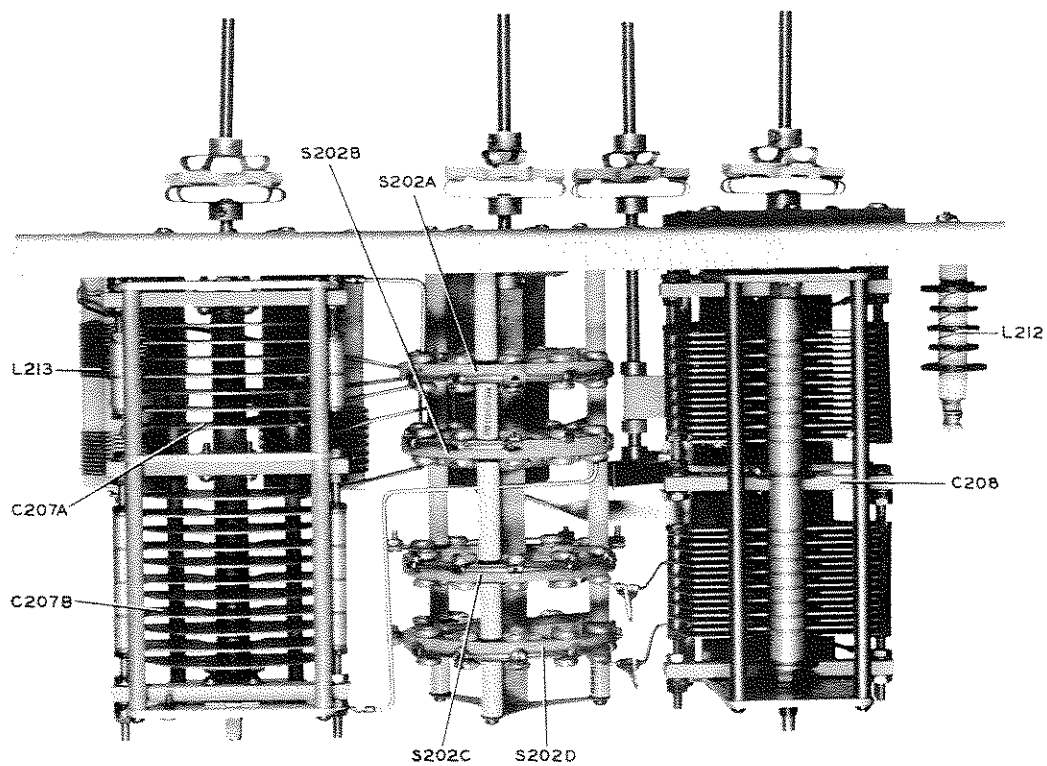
OUTPUT COIL & SWITCH ASSEMBLY, BOTTOM VIEW
